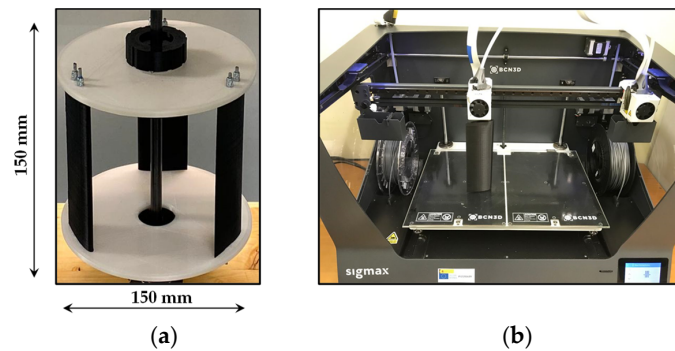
(a) Geometric characteristics of the turbine. (b) Blade fabrication process using a 3D printer.
